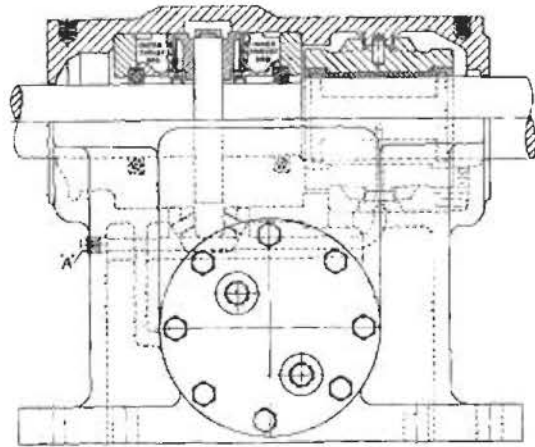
Pedestal type self-contained mounting for double thrust and journal bearing. Cooling coil is contained in pedestal. Shaft is shown with integral collar, but type shown in Figure 53 may be used. STANDARDIZED.
